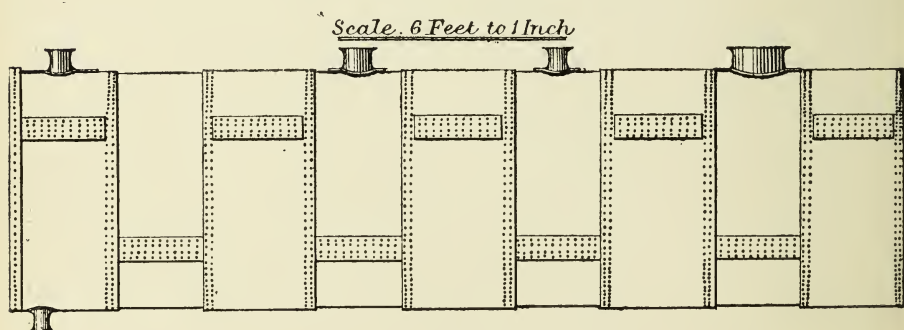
SIDE ELEVATION OF A LANCASHIRE BOILER.
